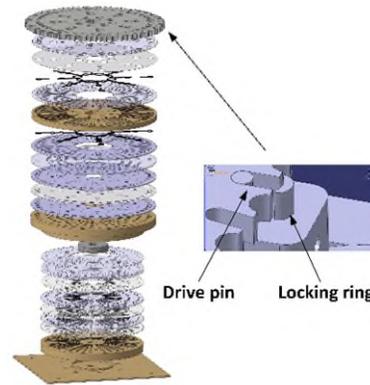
Exploded view of the 20 layers multi-chamber sample disc and Geneva gear mechanism.
